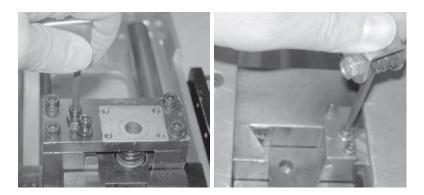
To loosen the slide tension, retract the front adjustment screws (left), then screw in the back adjustment screw.
